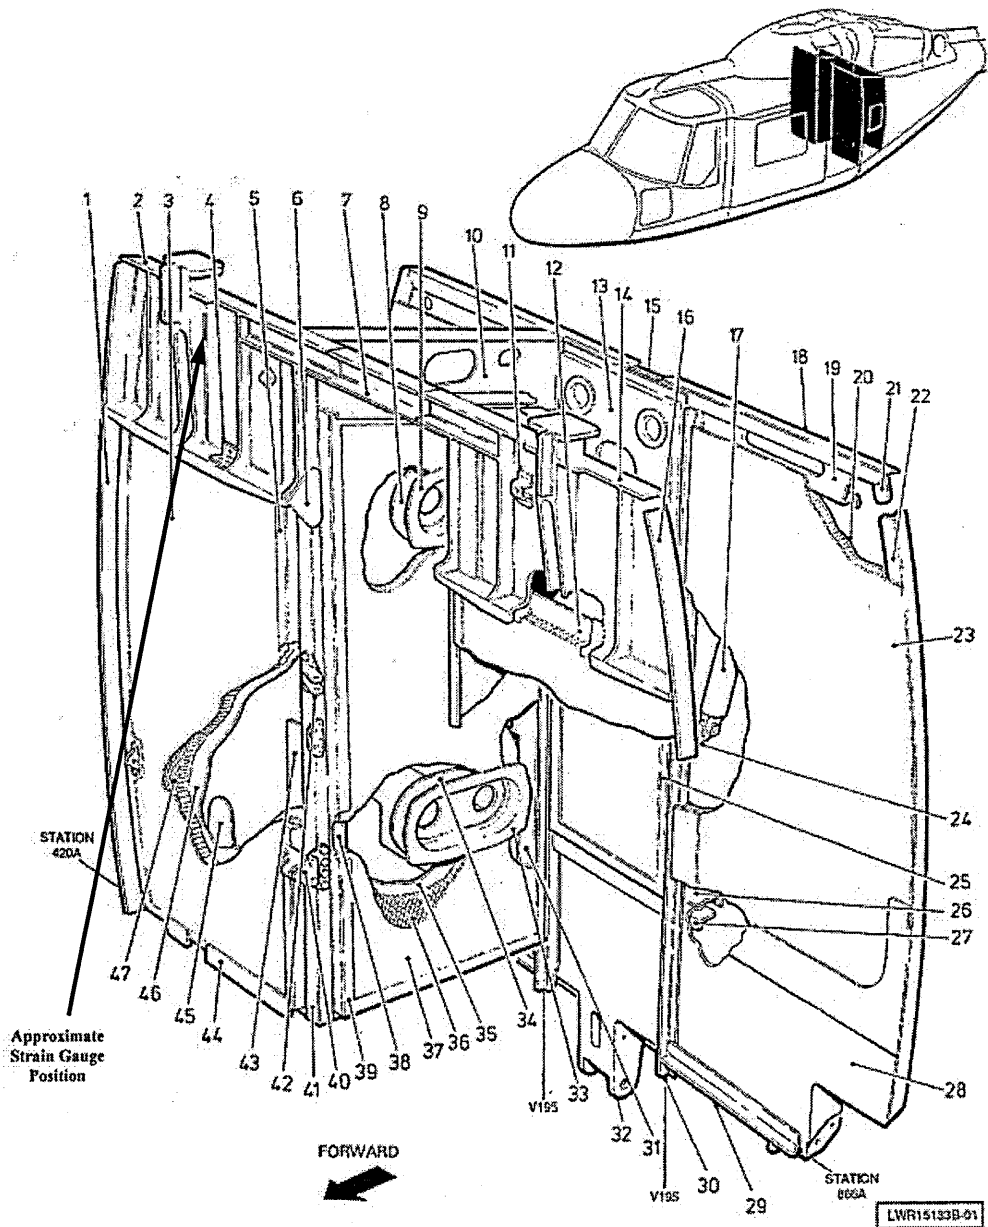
Westland Lynx helicopter Station 420A Starboard rear Main Rotor gearbox attachment fuselage fitting.
